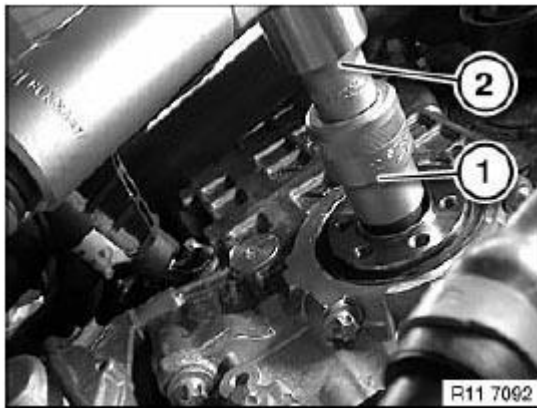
Releasing Central Bolt Using 3/4" Socket
